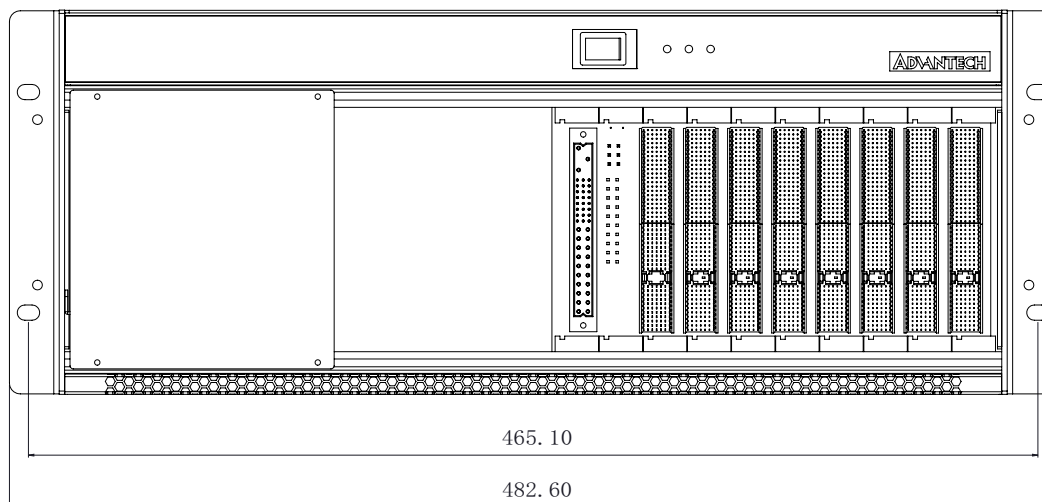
MIC-3022 Enclosure Mechanical Drawing
